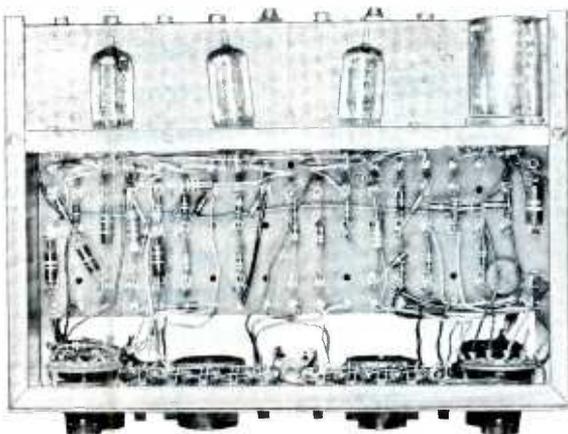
A Top View of the McIntosh Model C-108 Chassis With Cover Removed.
